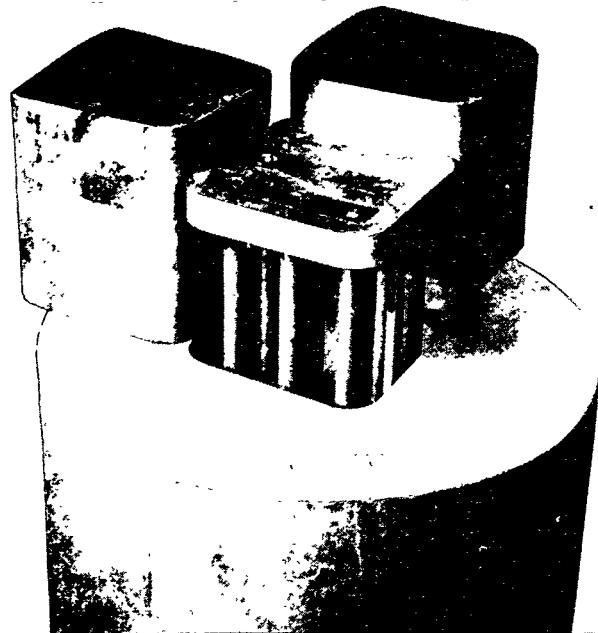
DIE ASSEMBLY FOR MOLDING NINE-HOLE
